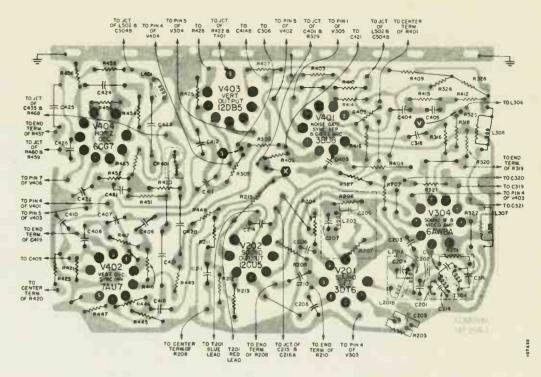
View of Wiring Side of Printed Wiring Board A5780-1 Used in All Chassis Except 16U1C, 16AU1C, 16W1C, and 16AW1C. Gray area represents printed wiring; black symbols and lines represent components and connections on opposite side.
